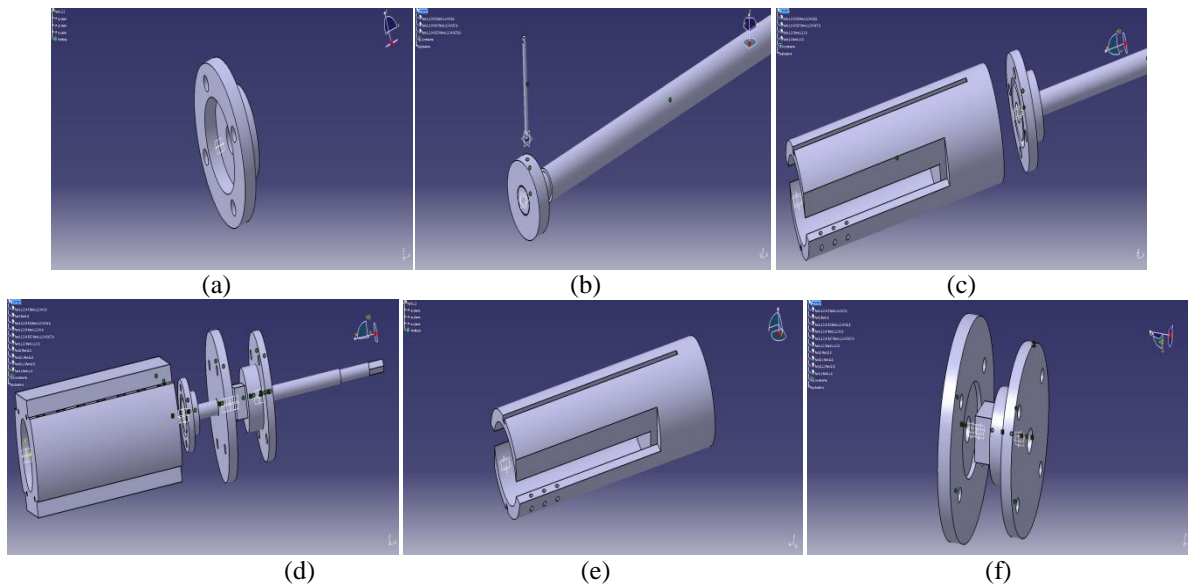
(a) Rear plate of trepanning tool (b) Pin and plate arrangement of threaded bar (c) Arrangement of parts with main cover (e) Trepanning tool (f) Arrangement of parts for spindle movement
